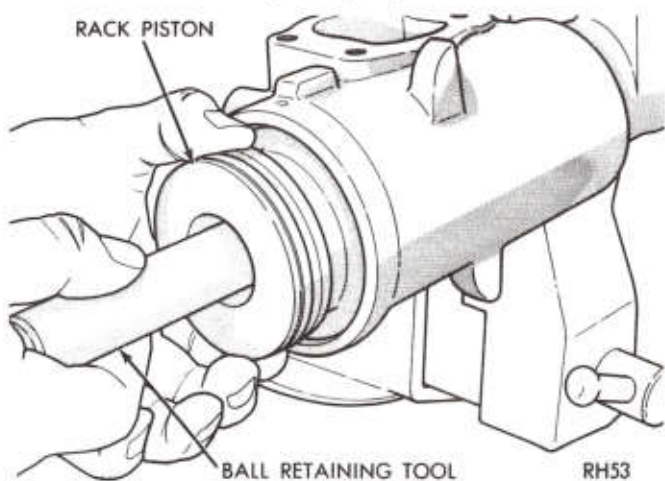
Remove Rack Piston (Ball Retaining Tool in Position)
